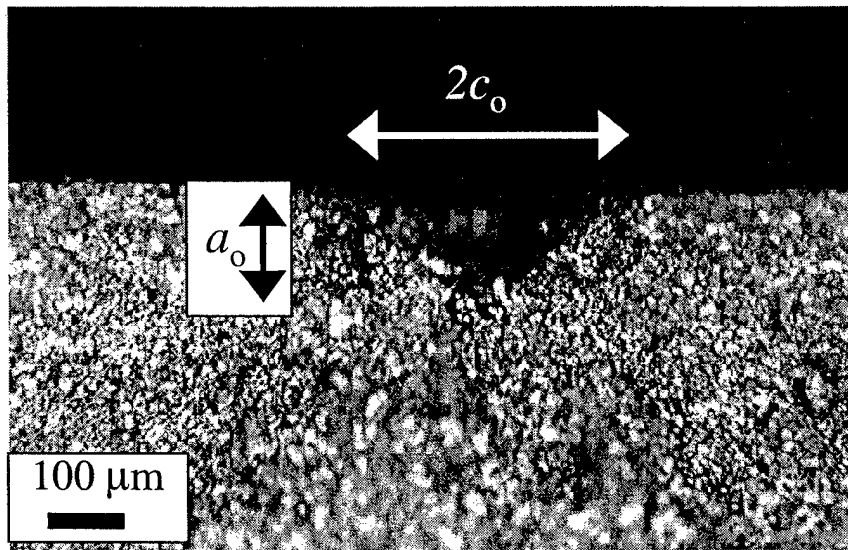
The initial region III crack dimensions ($a_o = 160 \mu\text{m}$ and $c_o = 228 \mu\text{m}$) are clearly seen in this photograph of the fracture surface of a fretting fatigue test on an STOA specimen with $\rho = 12.7 \text{ mm}$, $N = 50 \text{ N}$, $Q = 20 \text{ N}$, $\sigma_b = 300 \text{ MPa}$, and $N_f = 260,874$ cycles.
